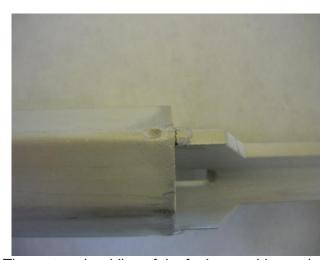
The ruptured welding of the fuel assembly number 01H40209
